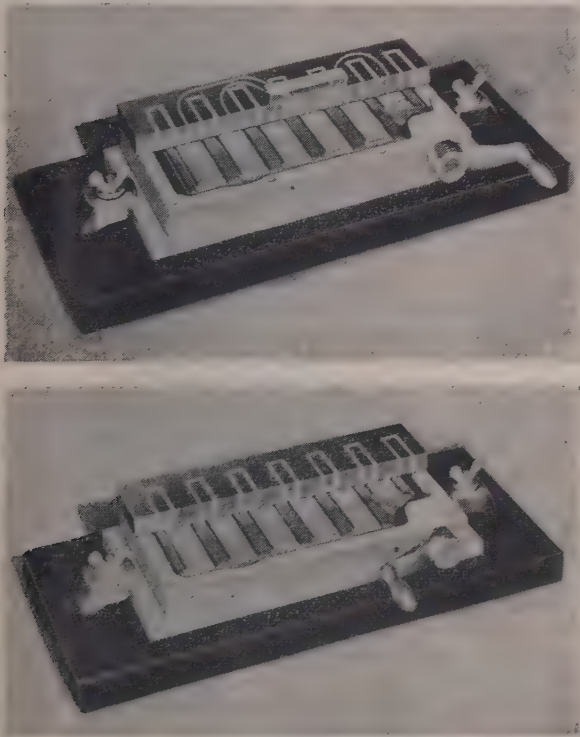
Cutaway view of magnet assembly for permanent-magnet chucks.
